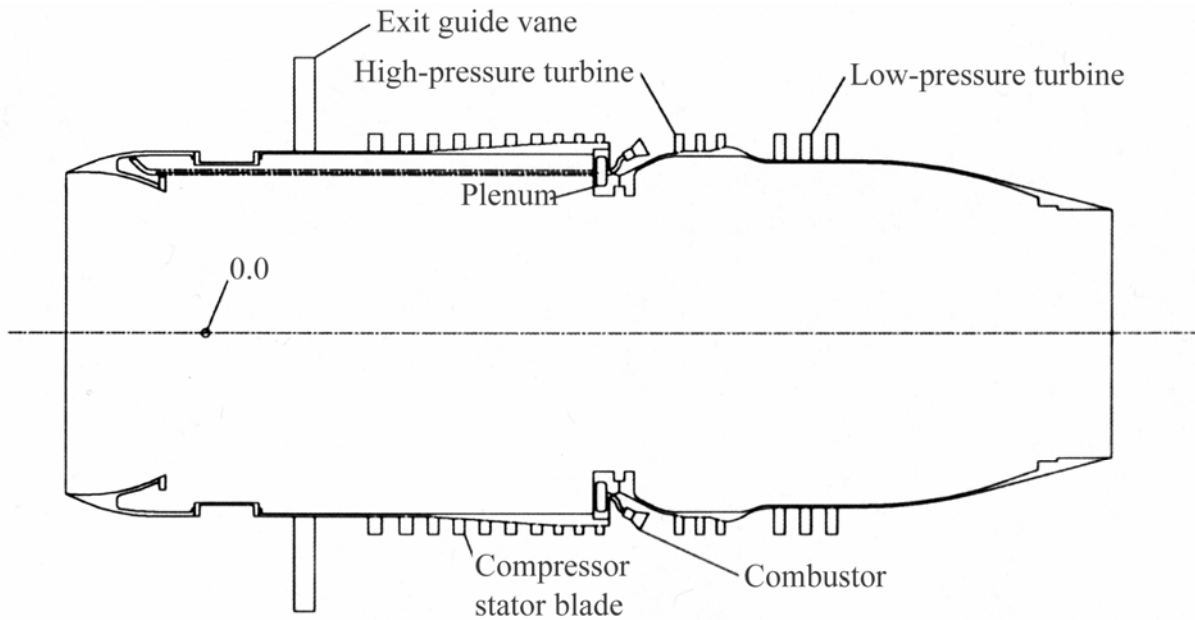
Longitudinal section of exoskeletal engine stator shell.
